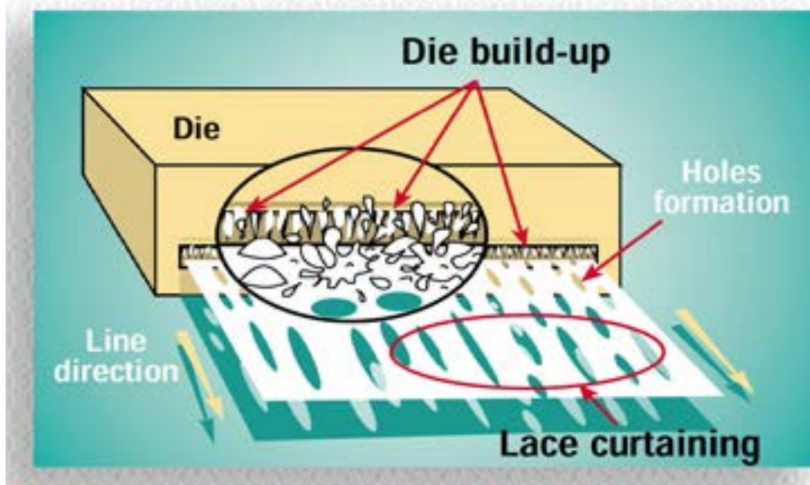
Schematic of die build-up causing lacing hole defects in an HDPE geomembrane
